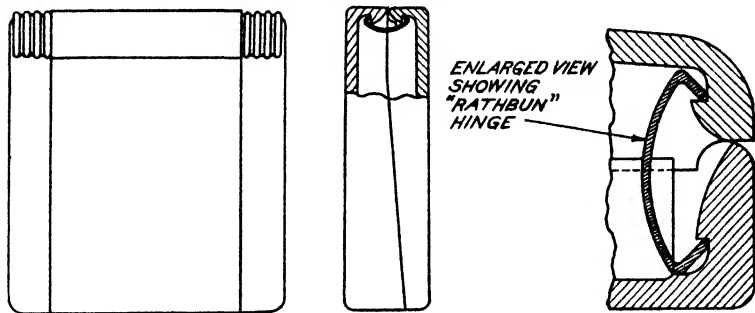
Box with Rathbun type of hinge that holds the moldings together by means of a C-shaped spring snapped into place. Although the recesses in the moldings for the clip constitute undercuts, they are not deep and are so placed that the molding, if rocked when pushed off the force, clears the latter. Edges of the moldings at the hinge are so shaped that the cover rocks and it is held open automatically when moved through 90 deg.
